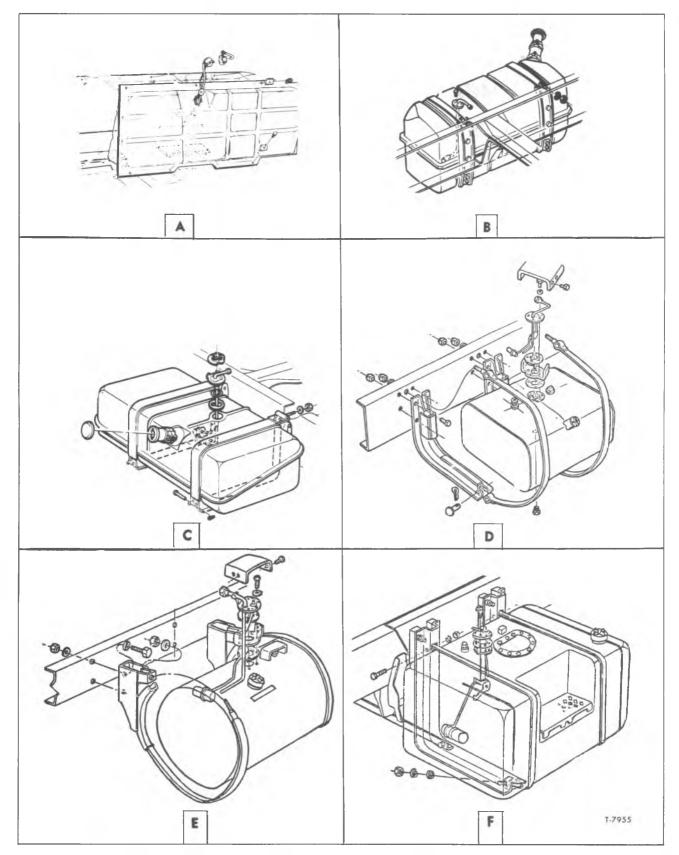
Cab and Frame Mounted Fuel Tanks (Typical)
